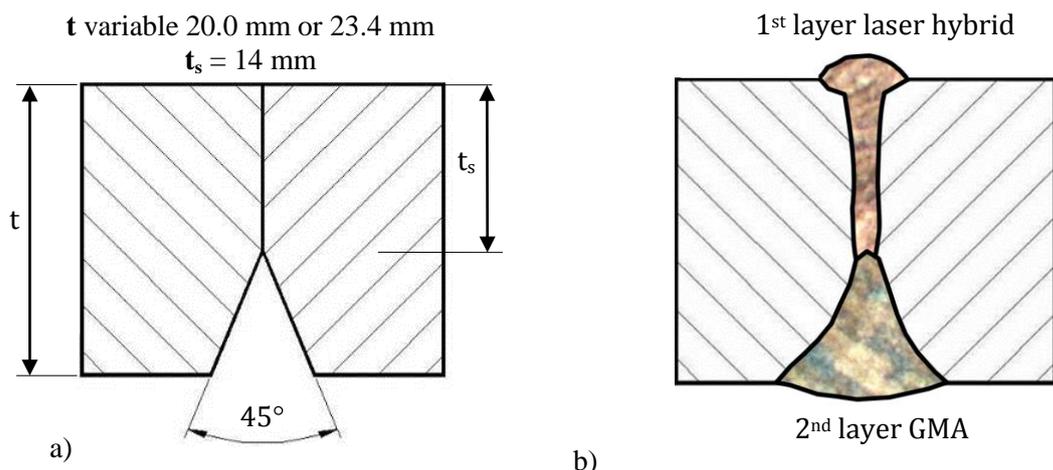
Edge preparation (a) and welding sequence (b)
